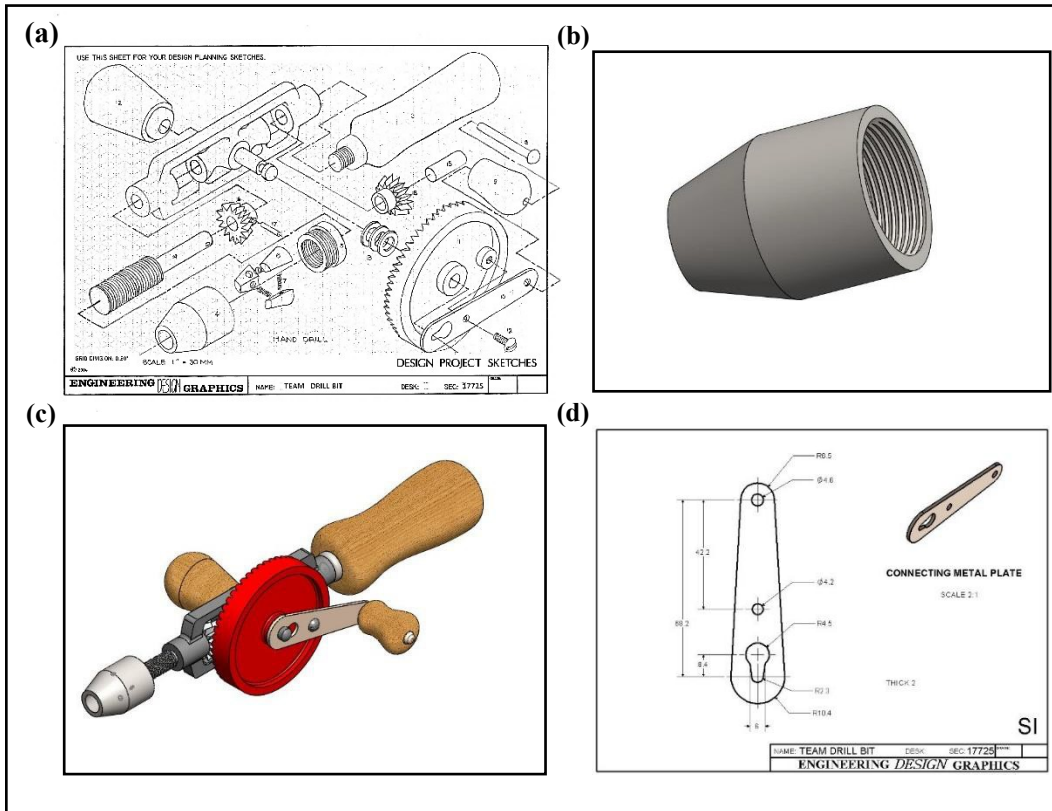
Examples of the Design Project Documentation: (a) Sketches, (b) 3-D Computer Model of Part, (c) Computer Assembly Model, and (d) Dimensioned Part Drawing.
